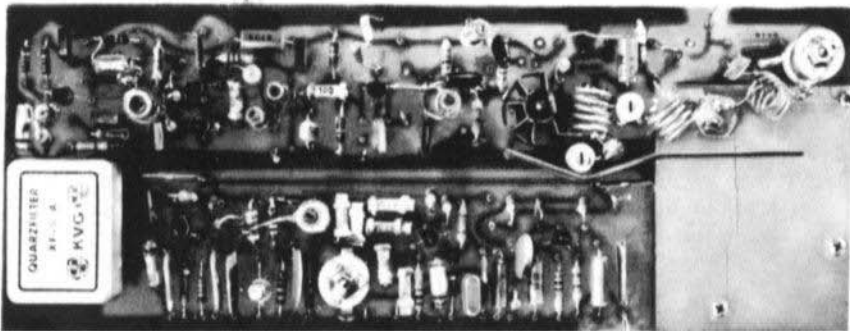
The completed printed circuit board of the 5 W SSB transmitter
